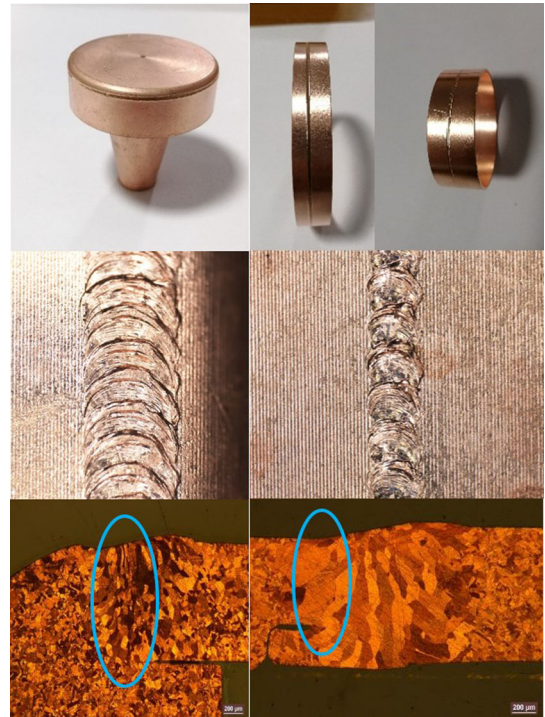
EBW samples and photos of the electron beam welds.
